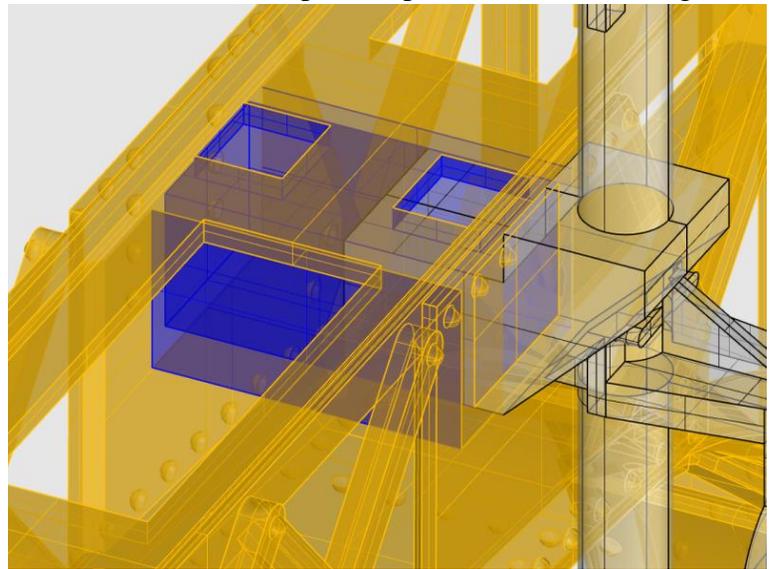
The mounting box (blue) is printed inside the bridge (gold). Wires are snaked through the top openings to run under the walkway. This design is a problem. I cut away that section between the two openings to make threading the wires easier.
